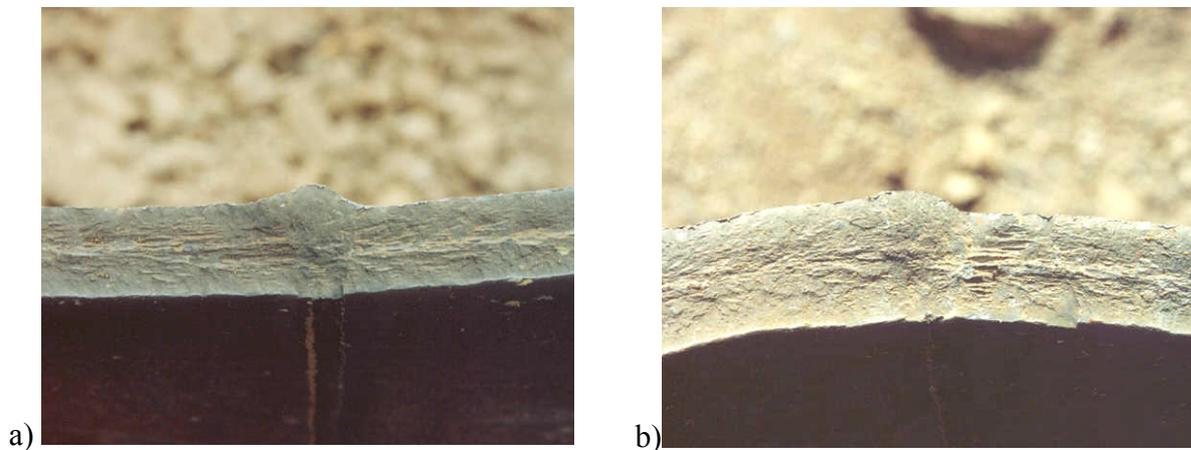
Fracture surface appearance of a) GMAW and b) SMAW joint after burst test.
